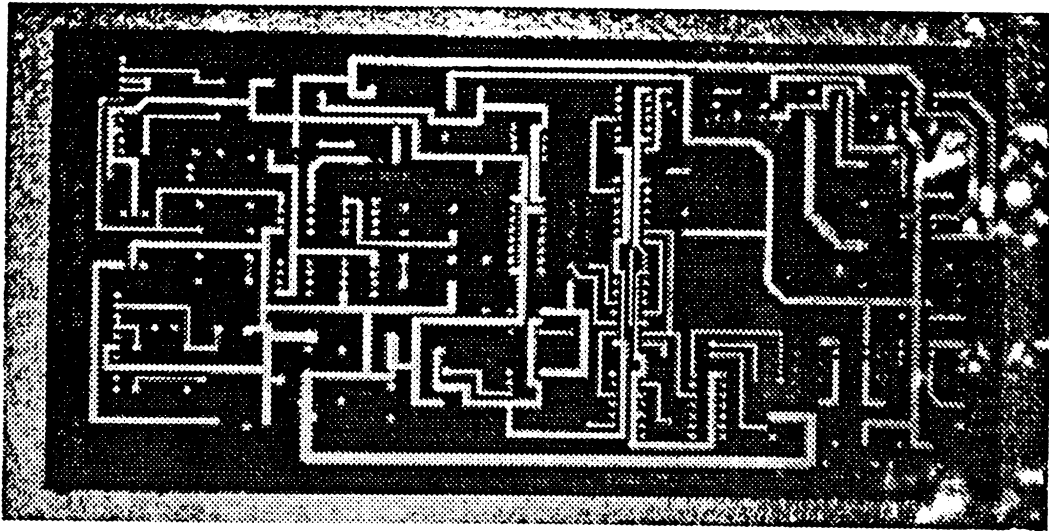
SAPARC Control Printed Wiring Assembly (Unstuffed)
